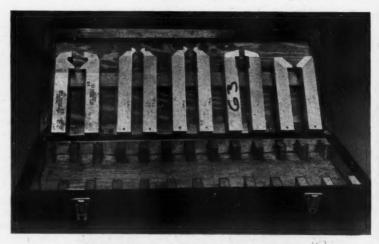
Five of the six pairs of tools provided for turning blade root grooves in turbine bucket wheels
